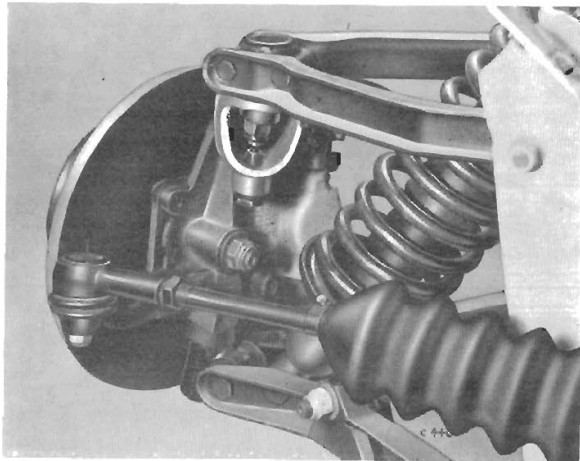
Using tool No. S.166A to release top ball joint from vertical link
